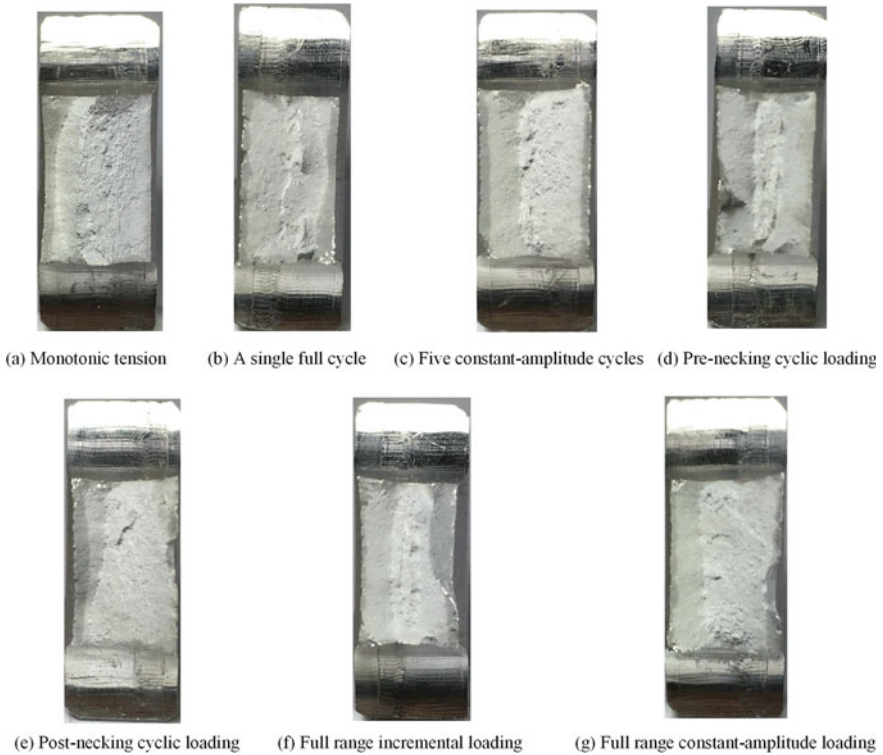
Fracture surfaces of DEN specimens
